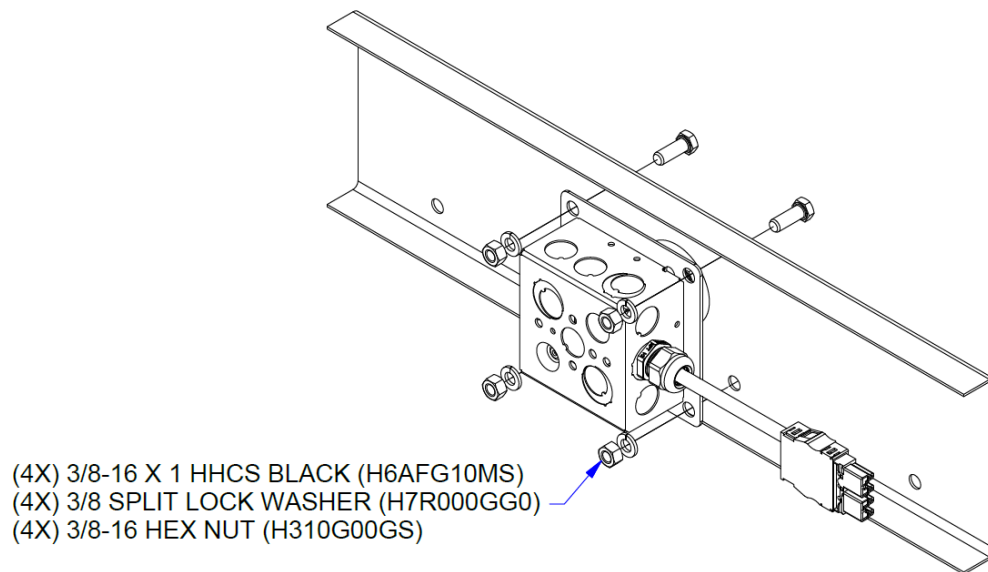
Contactor Box Attachment to Rear Beam
